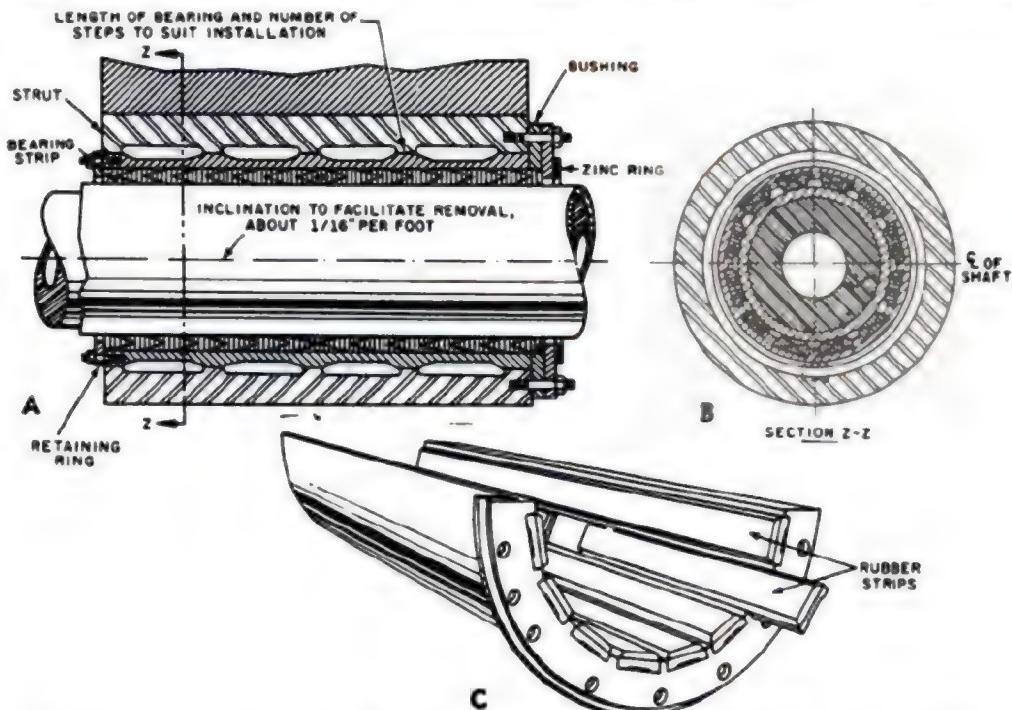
Details of underwater strut bearing. (A) Longitudinal view, (B) Cross-sectional view, (C) Rubber stripping in the bearing.
